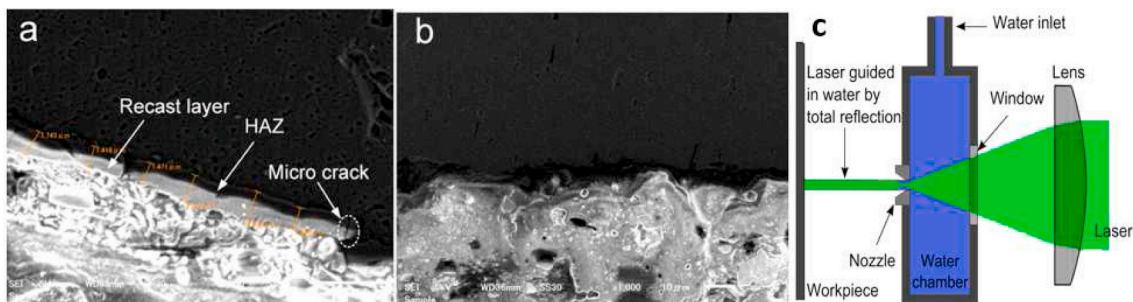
A comparison of the machined area on aluminium alloy workpiece by (a) laser micromachining in the air; (b) processed by waterjet-assisted laser micro-machining [310]. (c) Typical setup for hybrid laser-waterjet machining [306].
